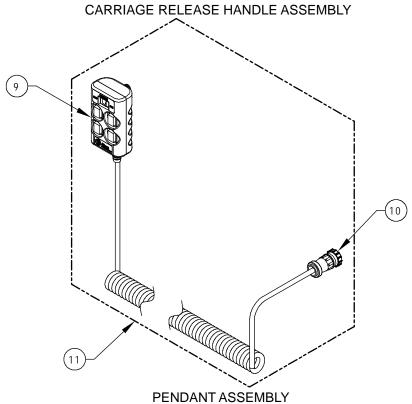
F10X-SERIES CARRIAGE RELEASE HANDLE AND PENDANT ASSEMBLY
